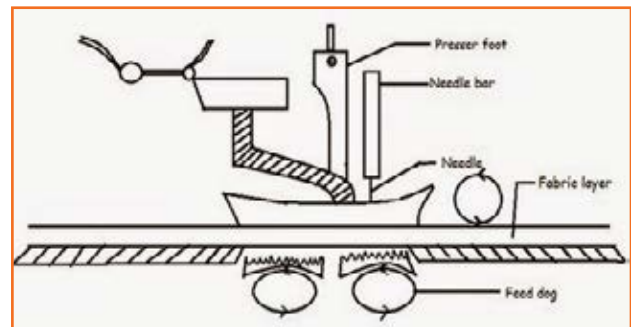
(b): Differential Bottom Feed Mechanism
